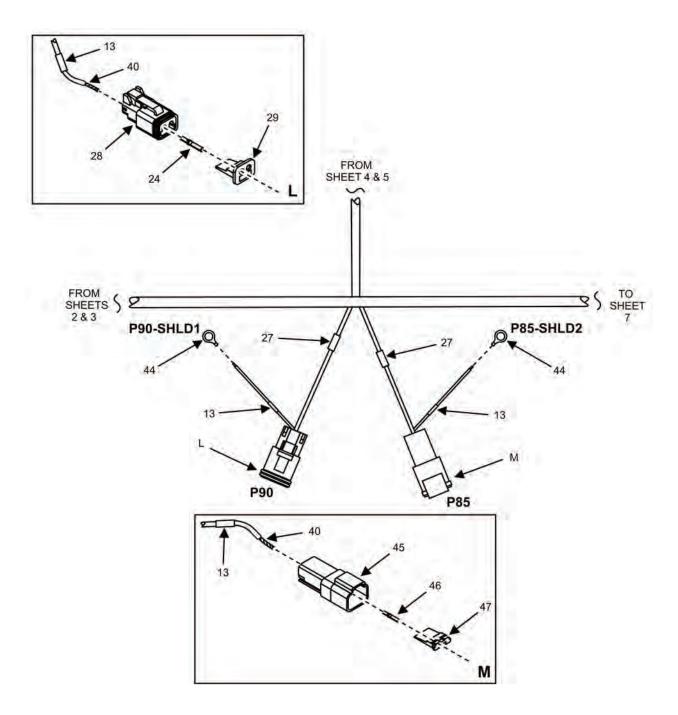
Engine Wiring Harness (Sheet 6 of 15).
